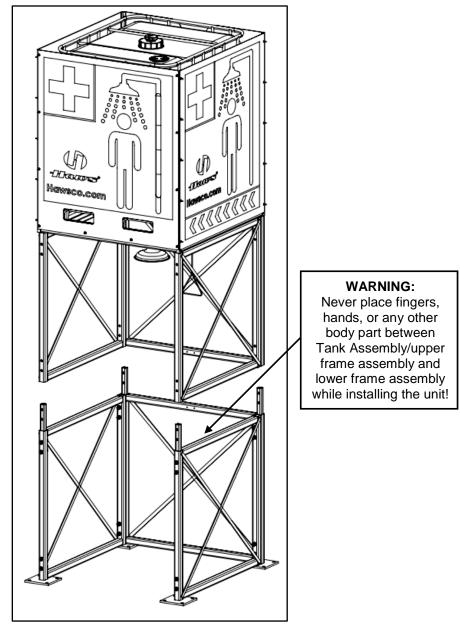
Mounting Tank Assembly and Upper Frame to Lower Frame
